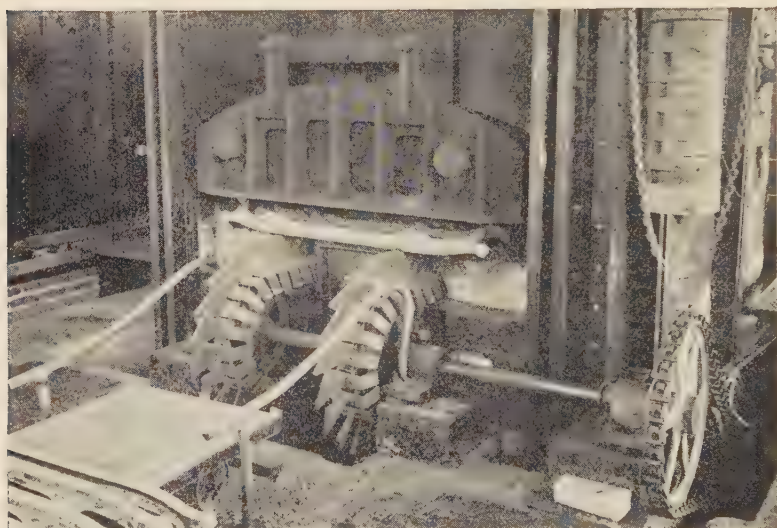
Discharge end of chain-conveyor furnace for automobile axles.
